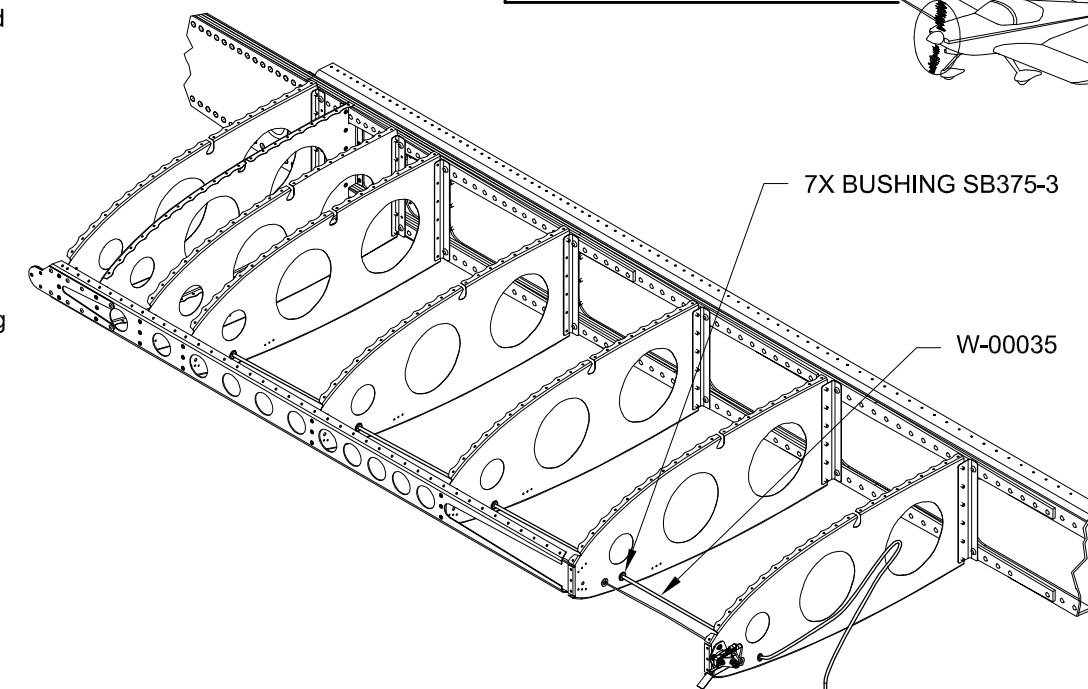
WING AOA LINE ASSEMBLY DETAILS
